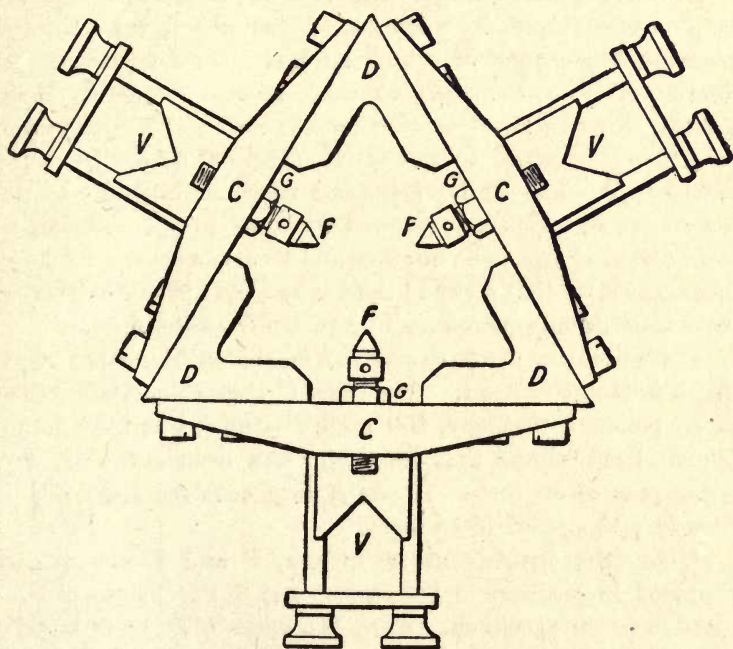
Strip Carrier and Specimen Grip for Springometer.
